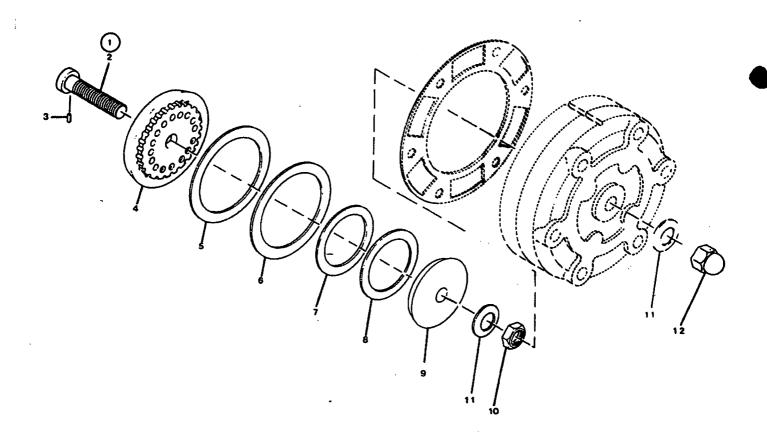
55 GA CONCENTRIC RING VALVE ASSEMBLY
